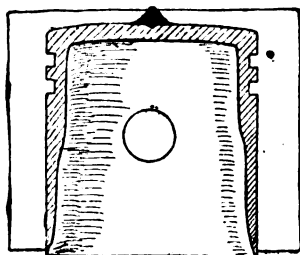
The collection of carbon on the top of the piston head is often greatly accelerated by the lathe center mark in the head, and where possible this hole should be avoided or filled up. It is the starting point at which the carbon begins to collect and soon there is a mound at this point. The rapidity with which carbon collects can be greatly reduced by smoothing the walls of the combustion chamber, especially the top of the piston. The surfaces should be polished with emery and crocus cloth.
